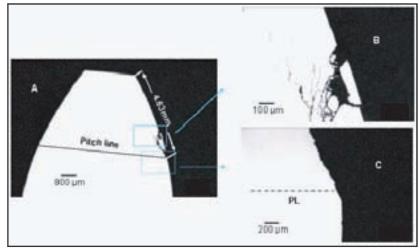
SEM image of a cross section through a spall on the 9th tooth of the HL3 run. This test involves a 15 cSt oil and a pitting gear.
